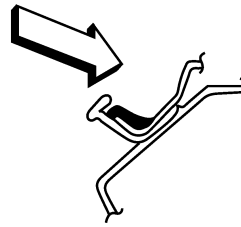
REAR FLOOR PAN AND CROSSMEMBER; TAIL LAMP MOUNTING; SWING GATE OPENING PANEL
